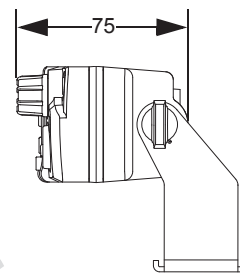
Side View of O5 Control Head with Remote Mount and Trunnion
